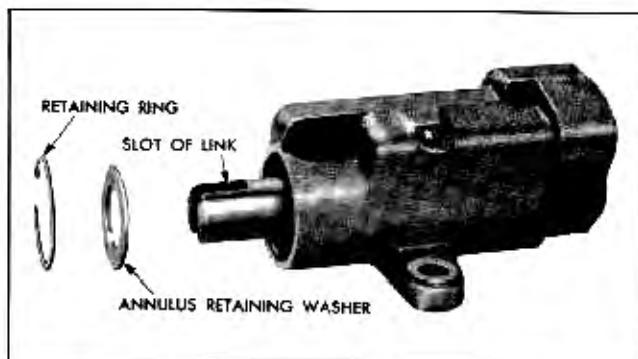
Exploded View—Annulus Retaining Ring and Washer
